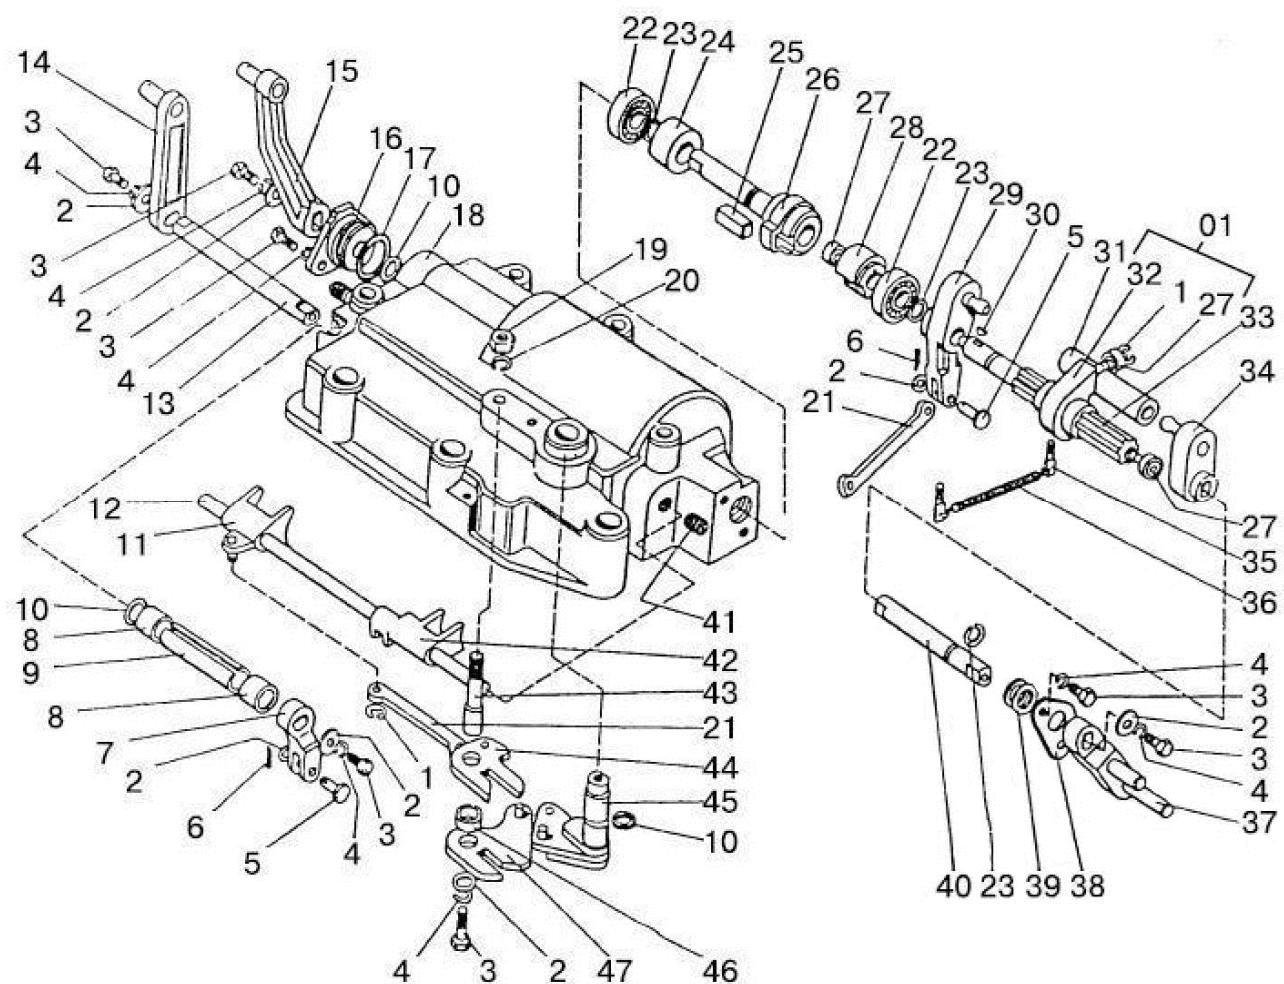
Switch (Hydraulic mounted system with combined adjustment)
